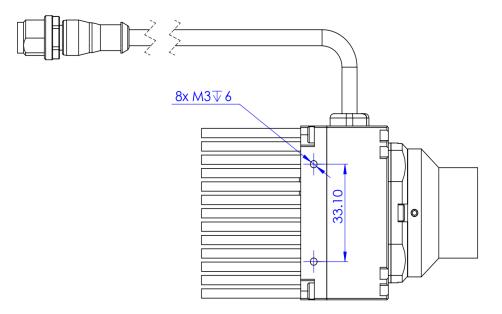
Schematic drawing of LT2PRXP device with the M3 threaded holes highlighted.
